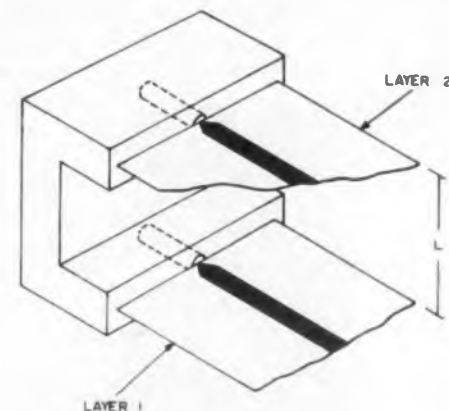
Double waveguide to strip transition for multi-layer strip assemblies.
